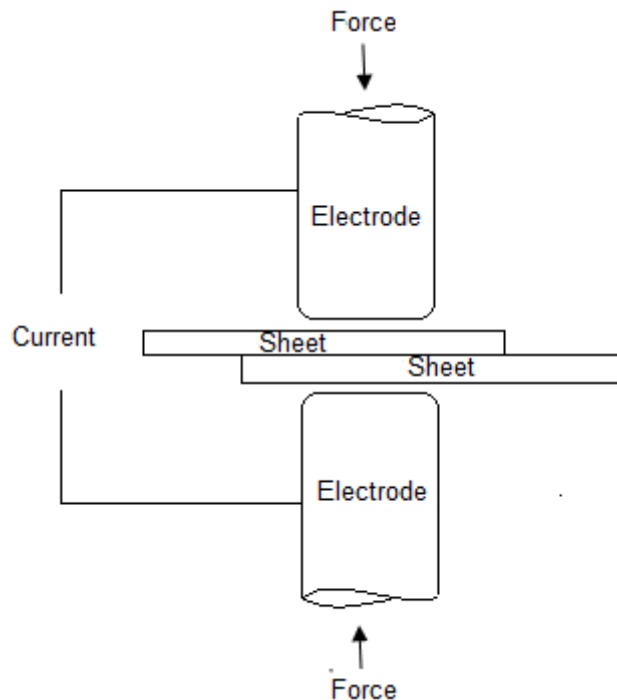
Resistance spot welding (the welding method needs double-sided access)
